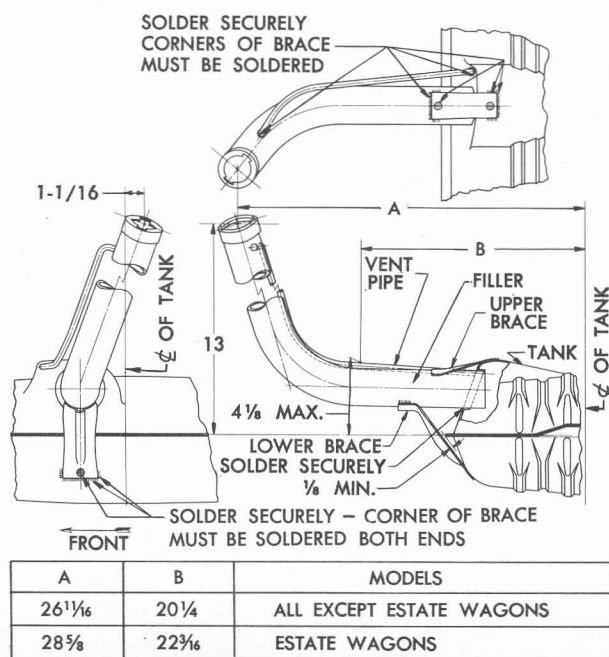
Location Dimensions for Gasoline Tank Filler—All 1948 Models
